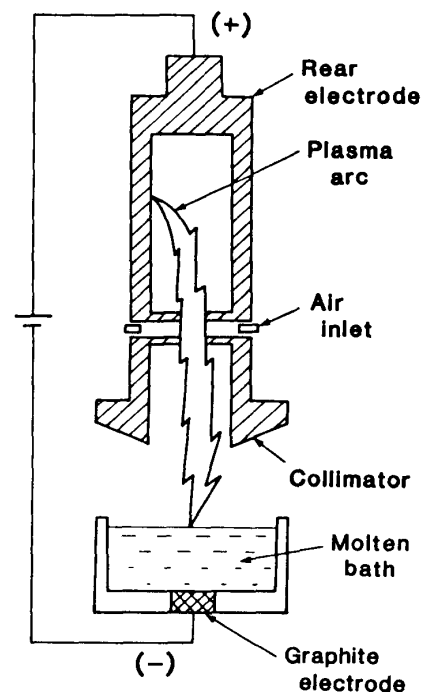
Schematic drawing of the transferred-type plasma torch.
